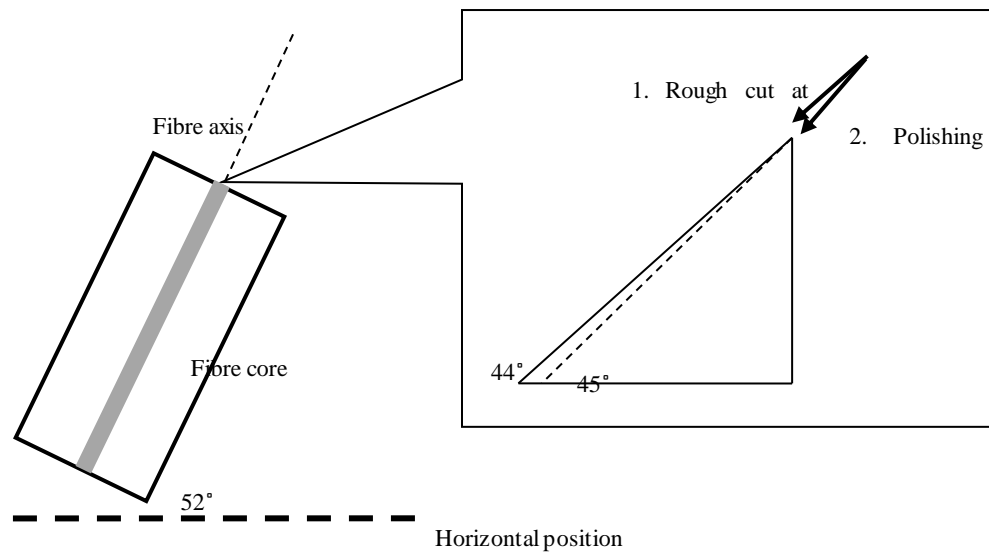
Side view of FIB machining of 45° mirror set-up. The fibre is tilted 52° in FIB chamber for FIB machining. The zoomed in part shows the steps used for machining the mirror: a rough cut at 44° and then polishing the mirror at 45° .
